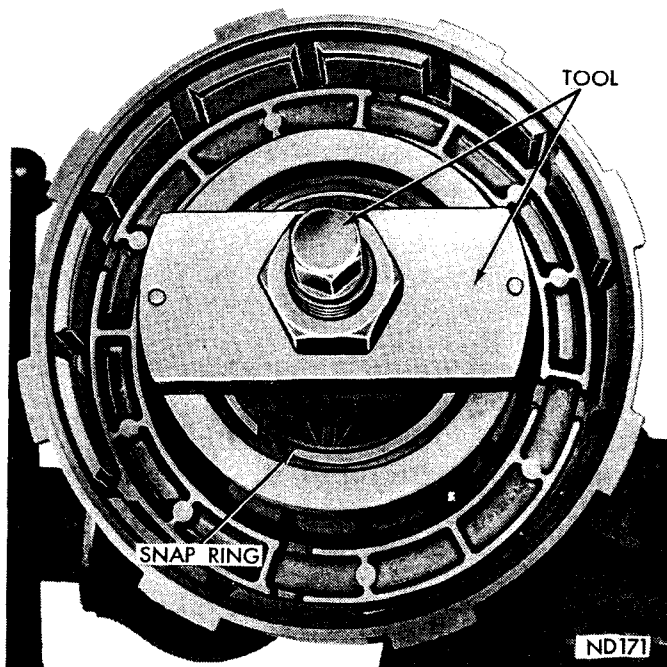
Removing or Installing Front Clutch Spring Retainer Snap Ring
